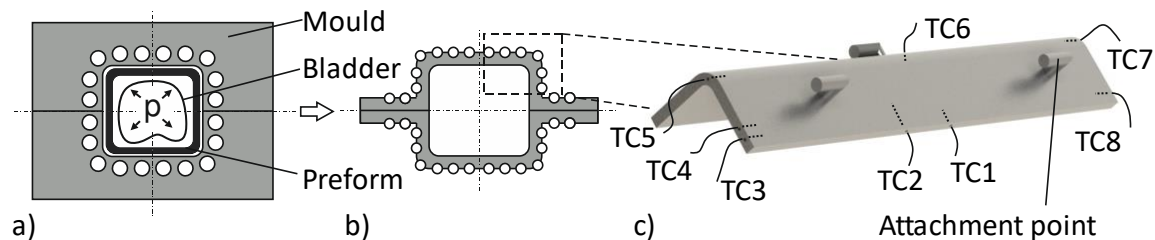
a) Classical two-part mould design with fluid heating channels for the BAM process, b) novel thin-walled mould design with heating elements on the outside of the tool, c) mould specimen used and positions of temperature measurement by thermocouples (TC)
